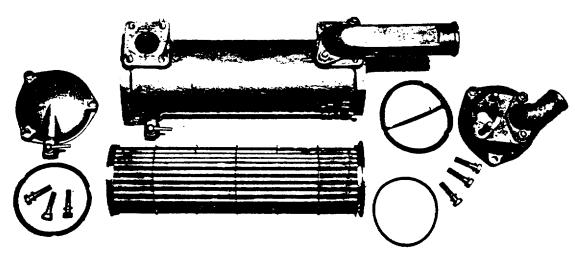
Exploded View of Heat Exchanger. (lowline engines)
